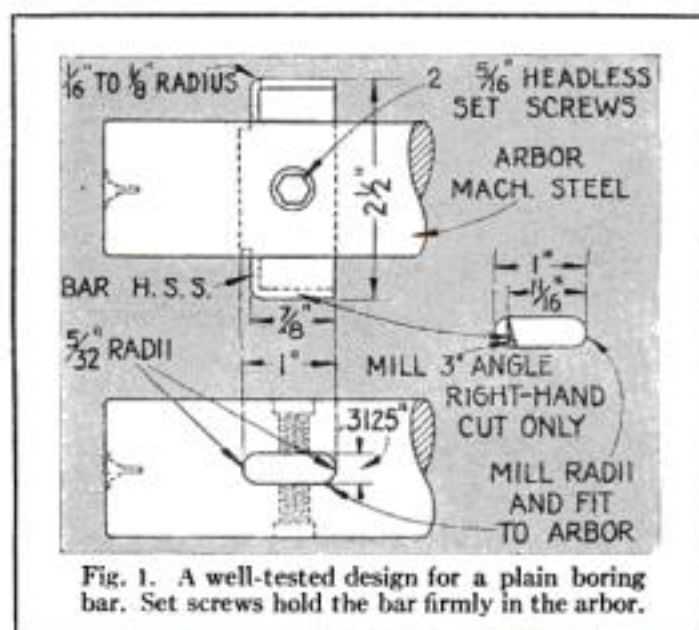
A well-tested design for a plain boring bar. Set screws hold the bar firmly in the arbor.
